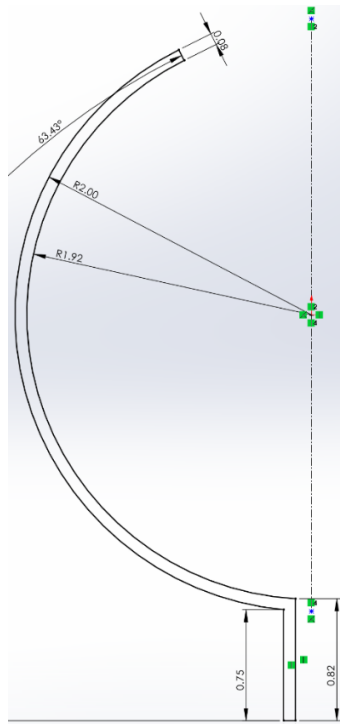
Sketch of major body piece that will be used to fabricate the PV using the "innovative" design.
